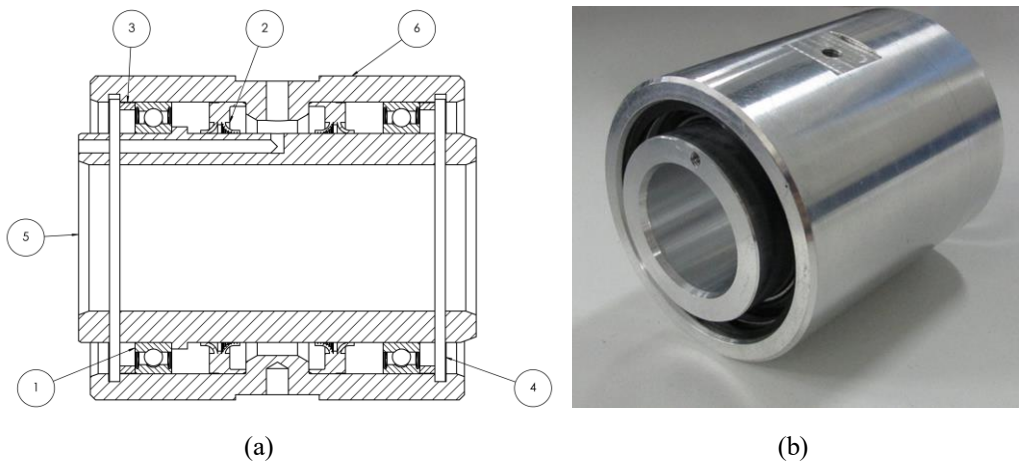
Toroidal pneumatic rotating joint of the ATPC system: (a) statoric part (6), rotoric part (5), bearings (1), seals (2), spacers (3) and seeger rings (4); (b) photograph of the prototype.
